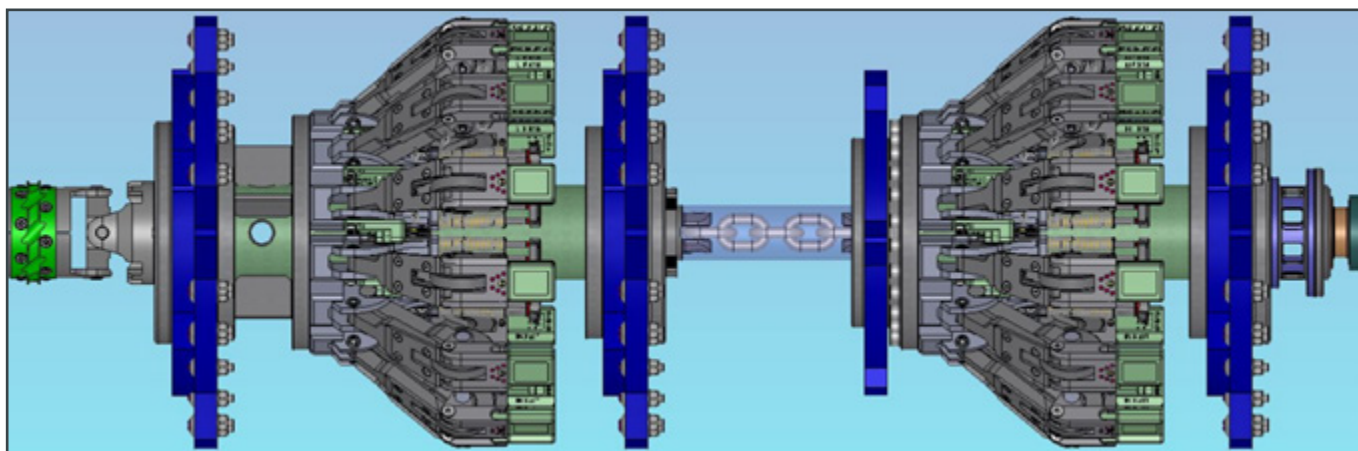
Geometry measurement units of the 12/16" RoGeo XT inspection system
